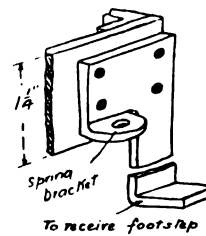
LAMINATED SPRING BRACKET AND STEP-HANGER.
